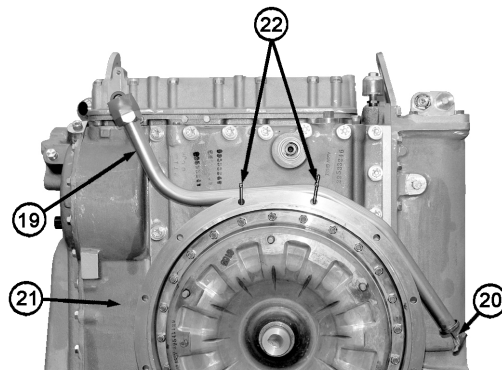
Oil Fill Tube Assembly. (X200-4A Only)
